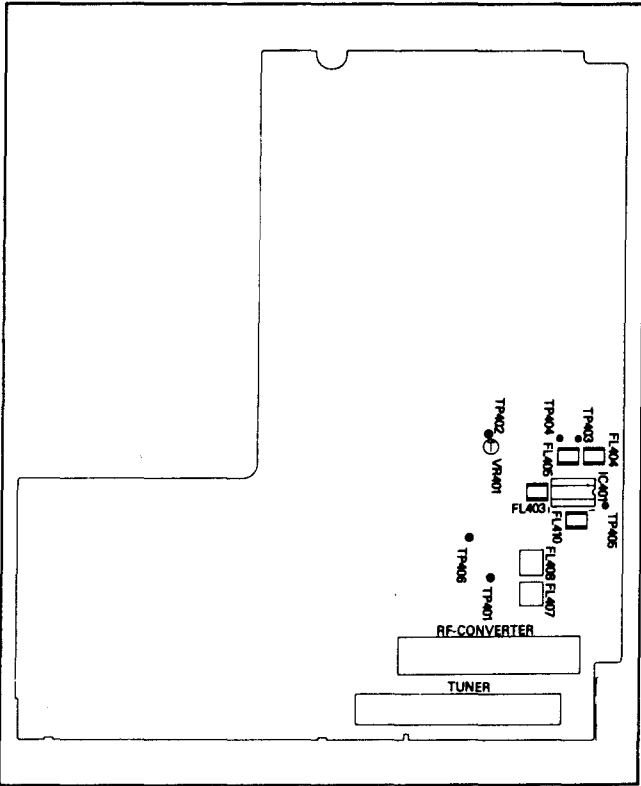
TUNER/DEMODULATOR SECTION in Main. A PCB-Component Side
